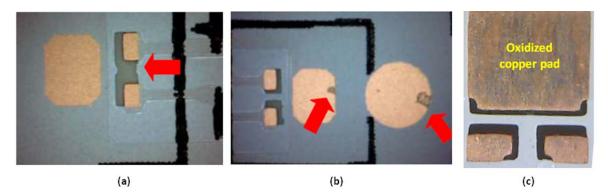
Examples of unacceptable defects and or contamination on incoming PCBs: missing solder resist between electrical pads (a), particles on exposed copper pads (b), and oxidized copper pads possibly due to poor OSP control, which may cause de-wetting and/or non-wetting of the pads during reflow (c).
